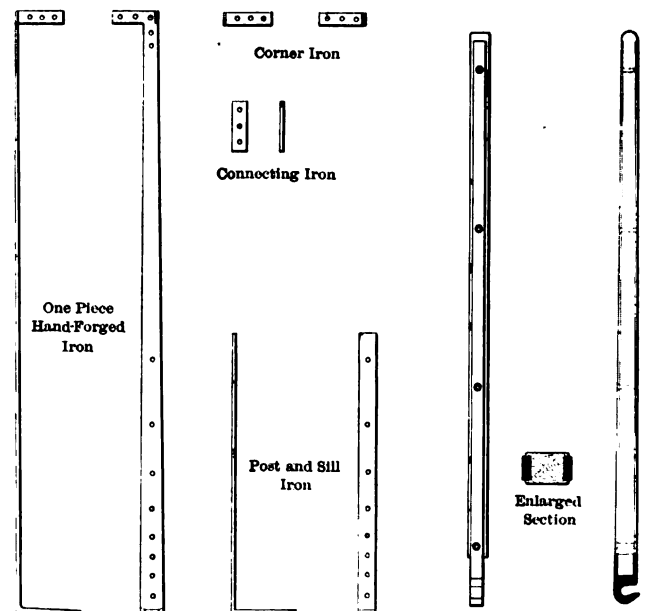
ONE-PIECE AND THREE-PIECE IRONS
